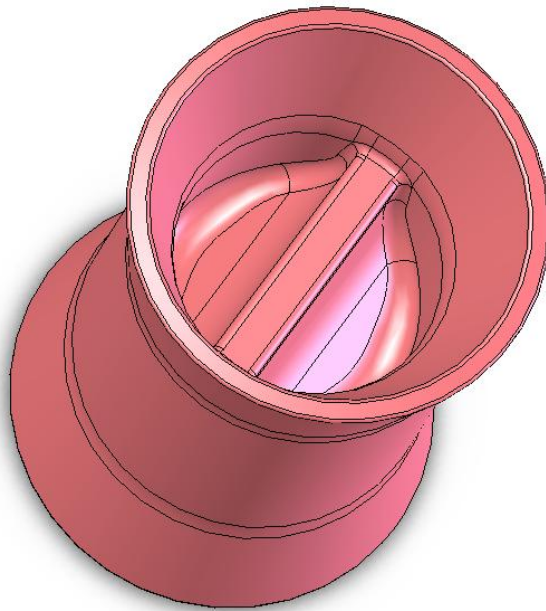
Isometric view of proximal end of valve with leaflets exposed.
